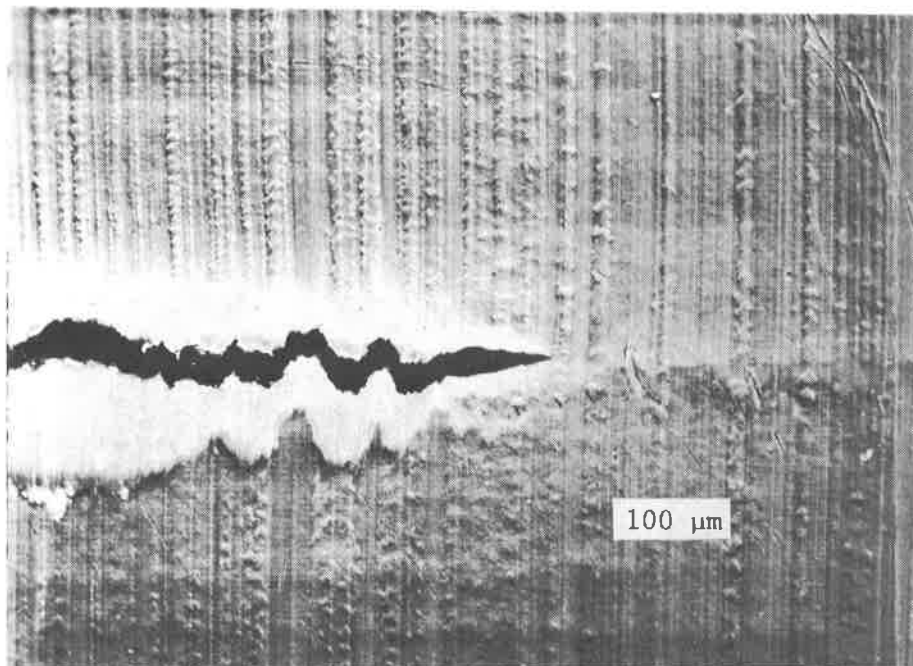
SEM IMAGE SHOWING END VIEW OF BREAK IN FACTORY WELD
